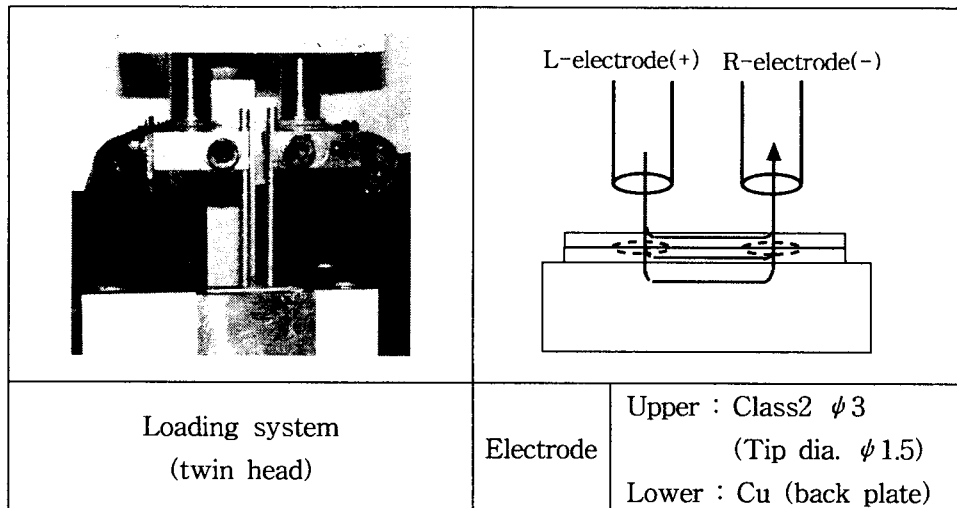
Appearance of welding head and schematic diagram of electrode
